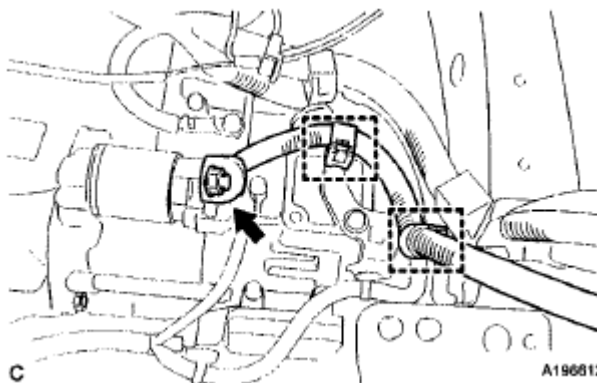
Locating Positive (+) Cable Nut With Clamps
